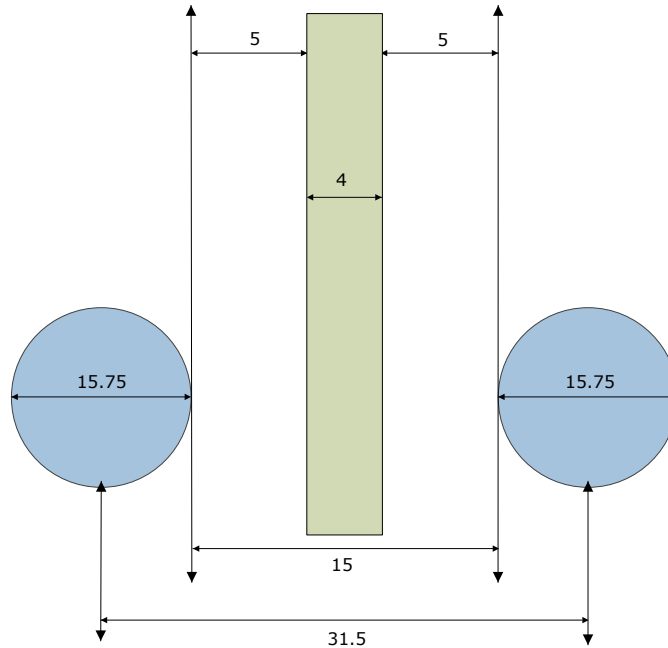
Dual-Trace Breakout Dimensions (mils)
